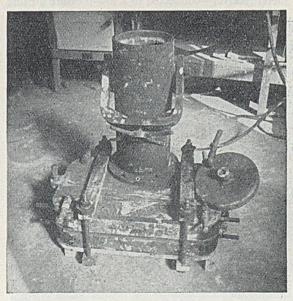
Mould assembled ready for casting. On top of the Mould is fixed a Top Plate to which is attached the Metal Receiver.
